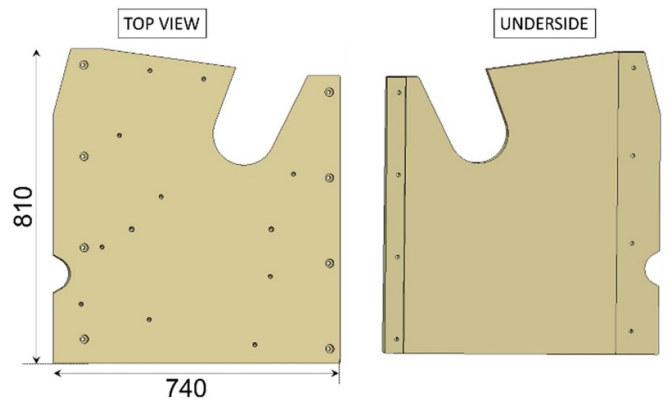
Top and underside views of ‘M4 Mirror Support Plate’ assembly with key dimensions in millimetres.
